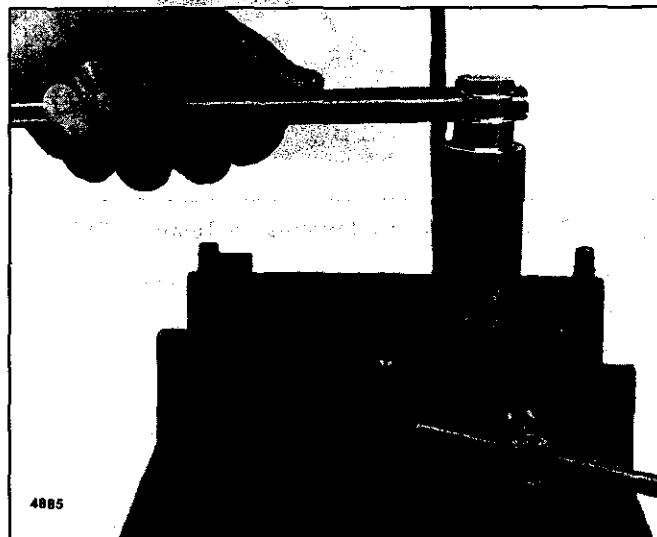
Removing Injector Nut Using Tool J 4983-01
